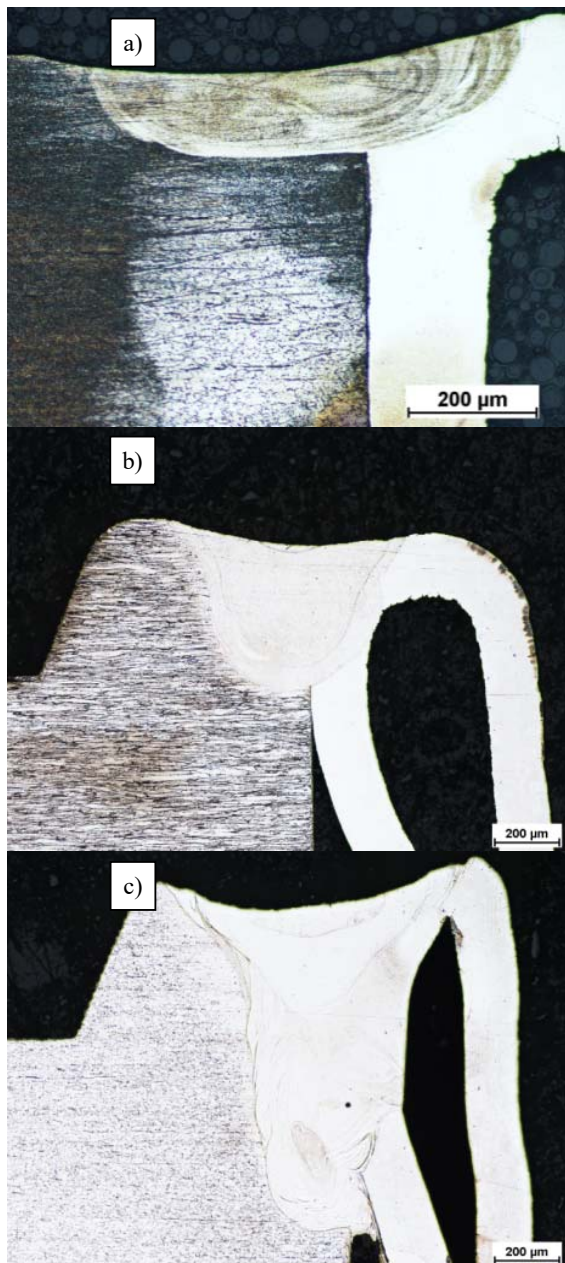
The macrostructure of the laser beam welded joints at different beam diameters: (a) 0.8 mm, (b) 0.6 mm, (c) 0.4 mm
